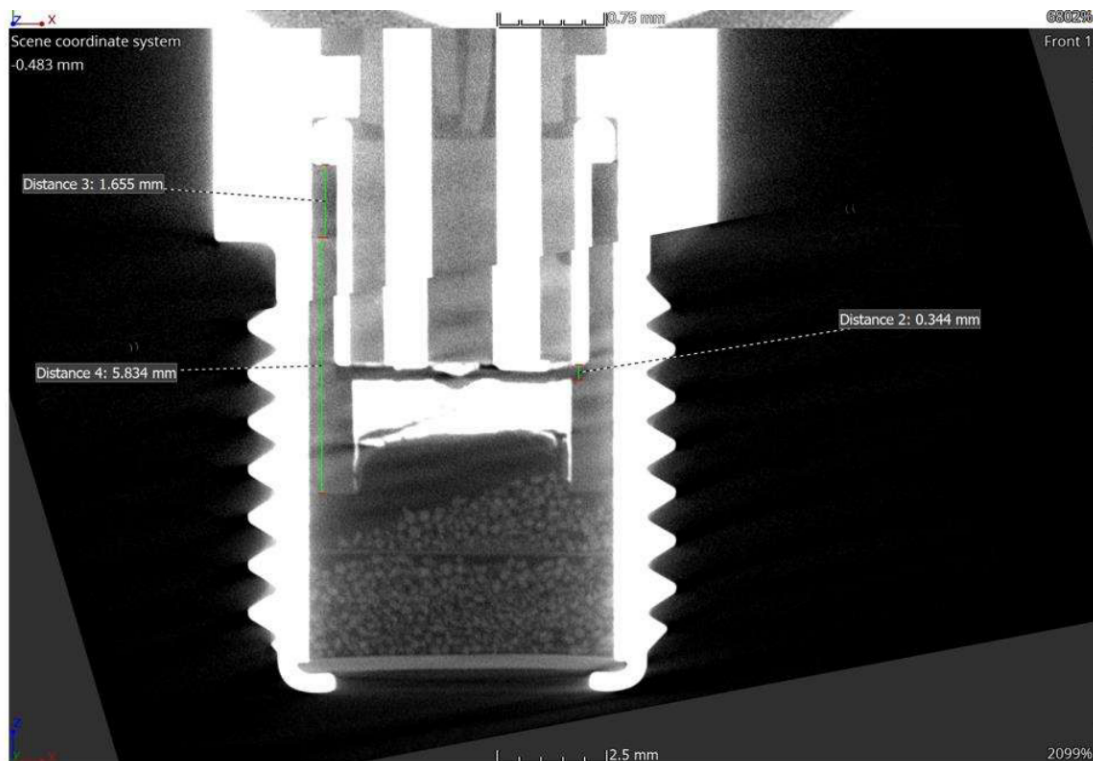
CAPS Igniter Assembly (Exemplar), courtesy Cirrus Aircraft
